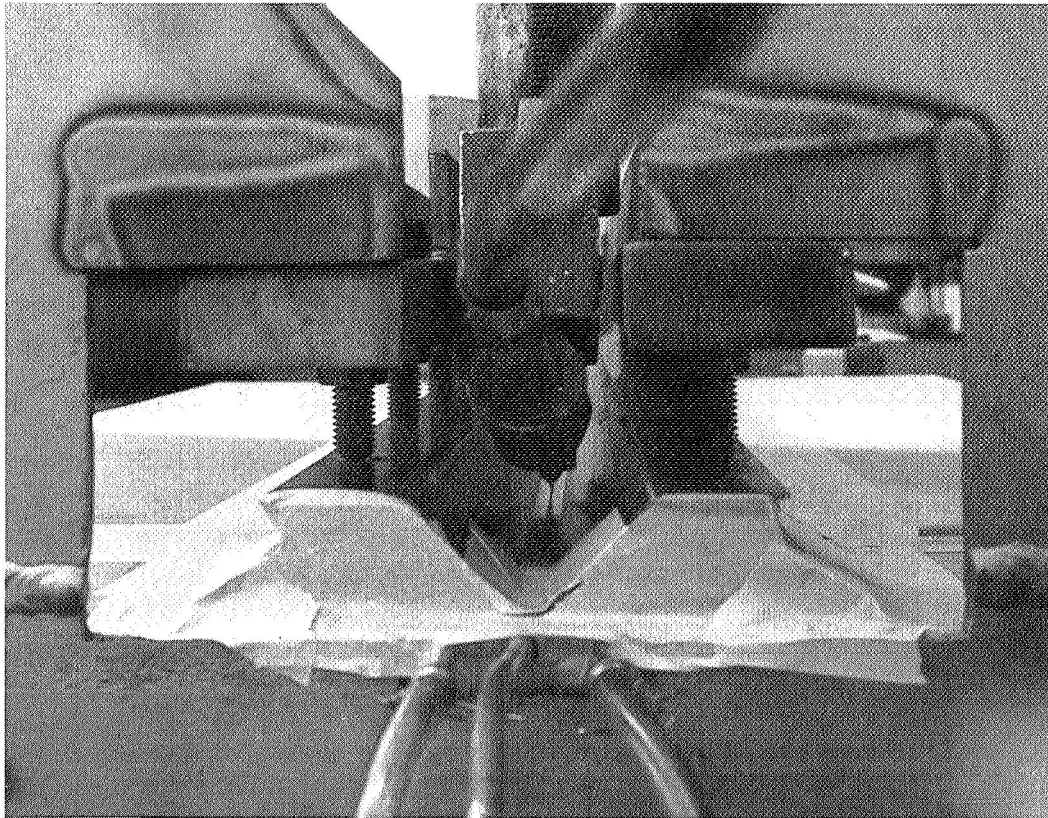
END VIEW OF WELD TOOLING USED FOR TITANIUM WELDING
